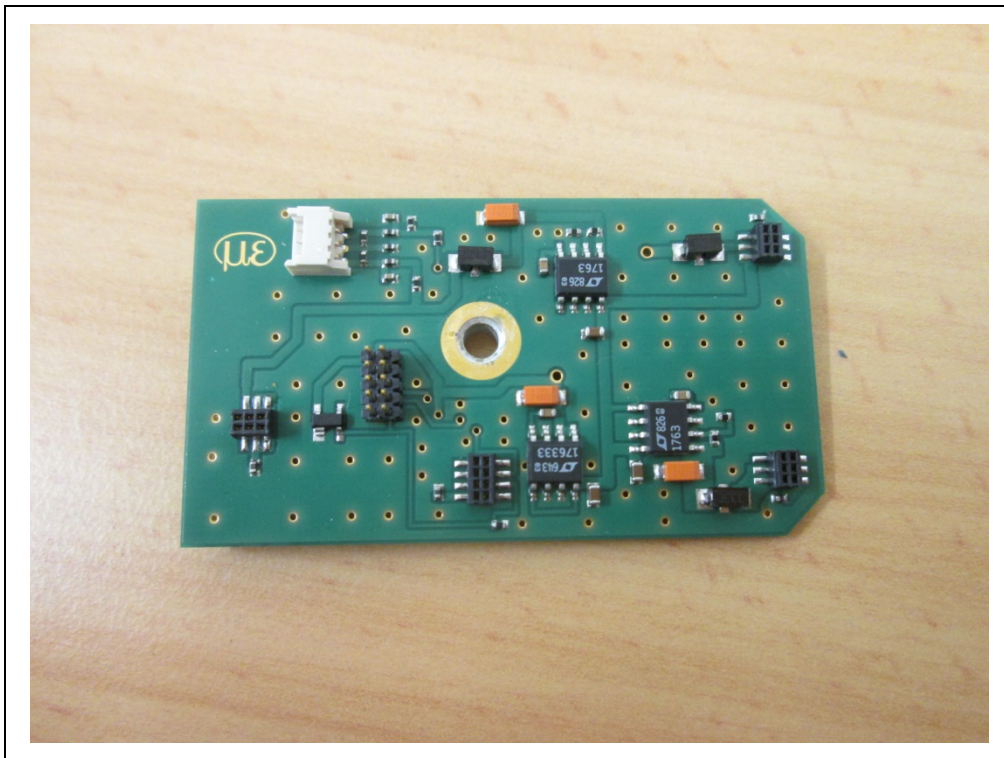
EUT#1, view of PCB 1 side 1 with connected sensor
